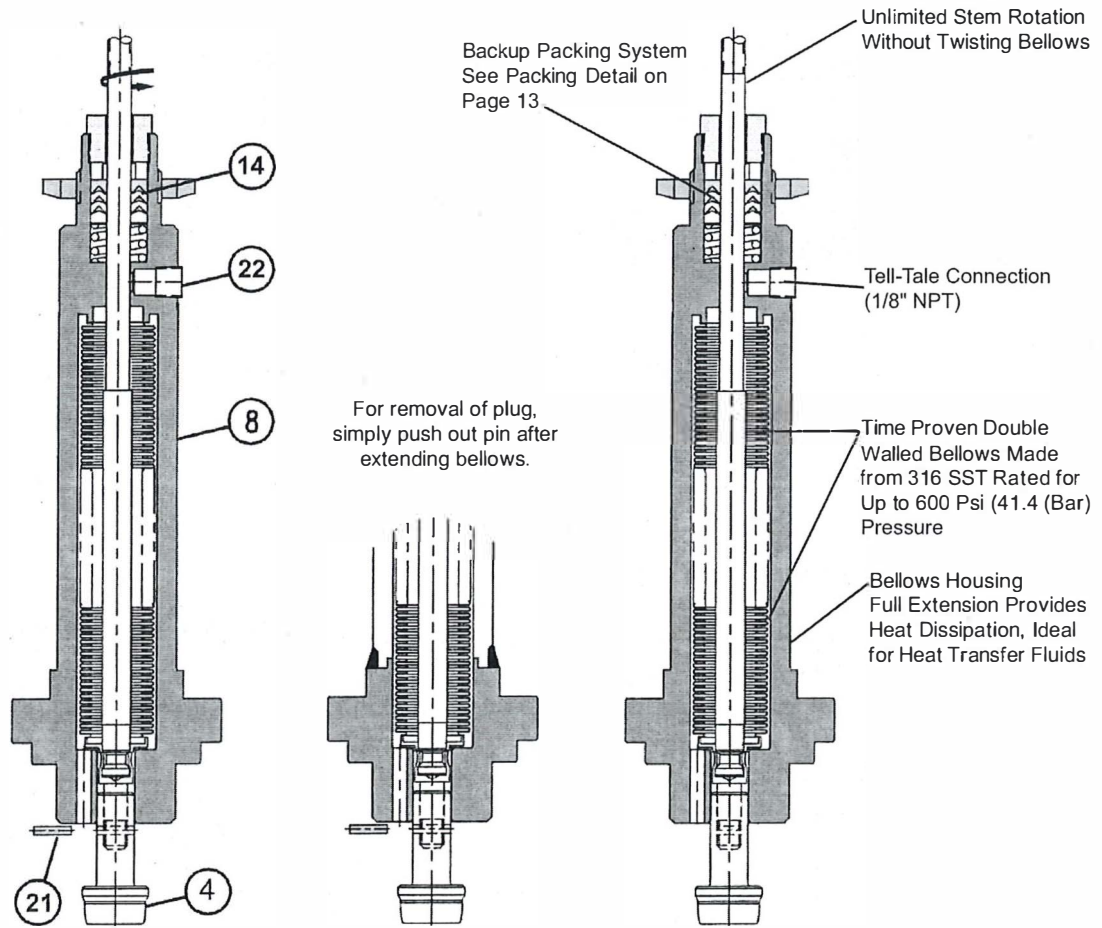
NOLEEK™ Bellows Bonnet Assembly
